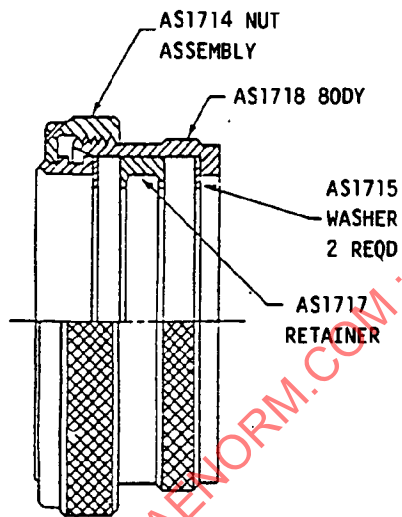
AS1712 COUPLING SUBASSEMBLY /11/
